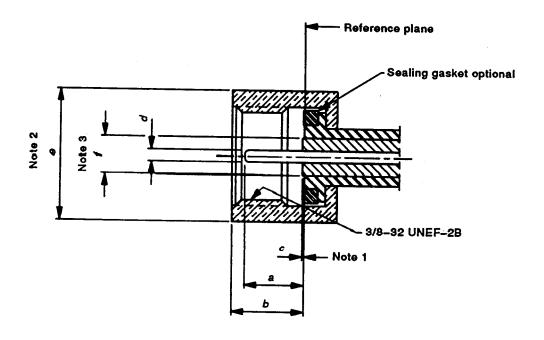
Connector with pin center contact (for dimensions, see table 1)
